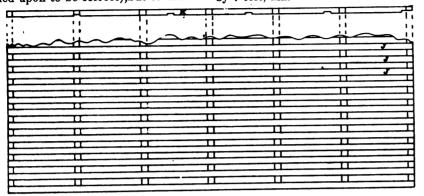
SHOWING THE PLAN OF THE ROOF OF THE WAGON TOP.
